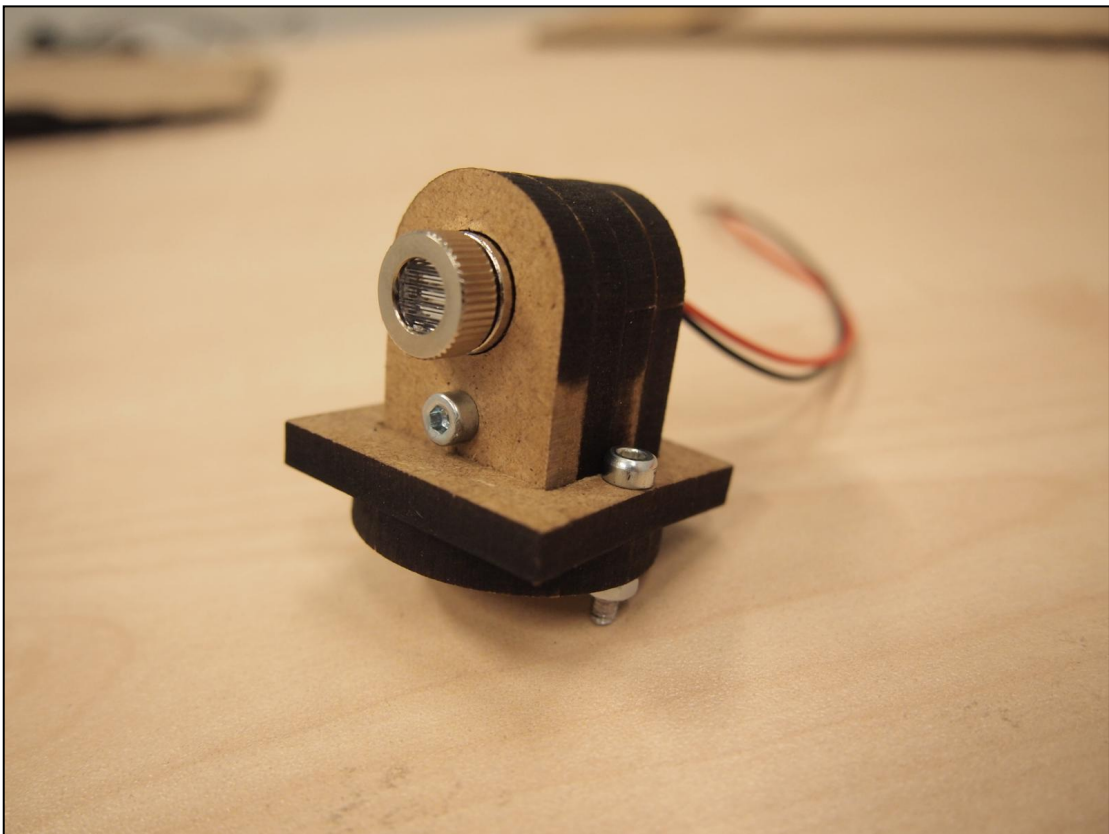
Parts needed for the assembly group 'Camera / Laser Bracket'.
